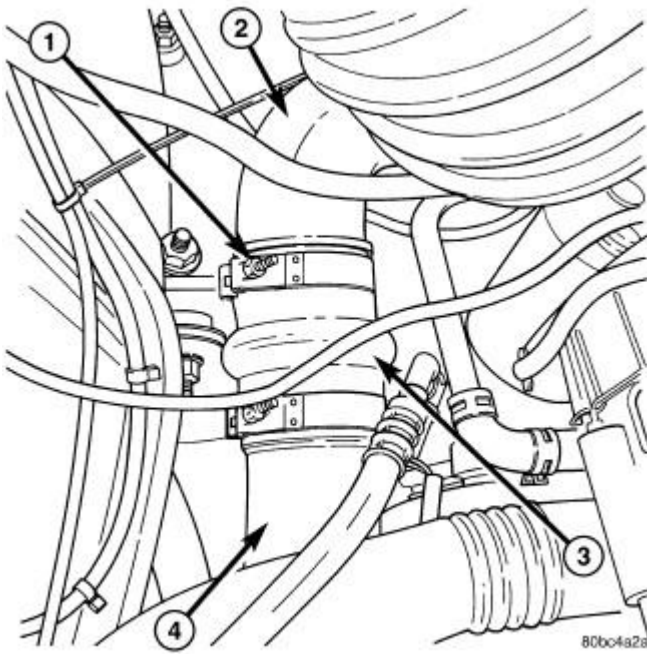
AIR INLET DUCT RUBBER SLEEVE
